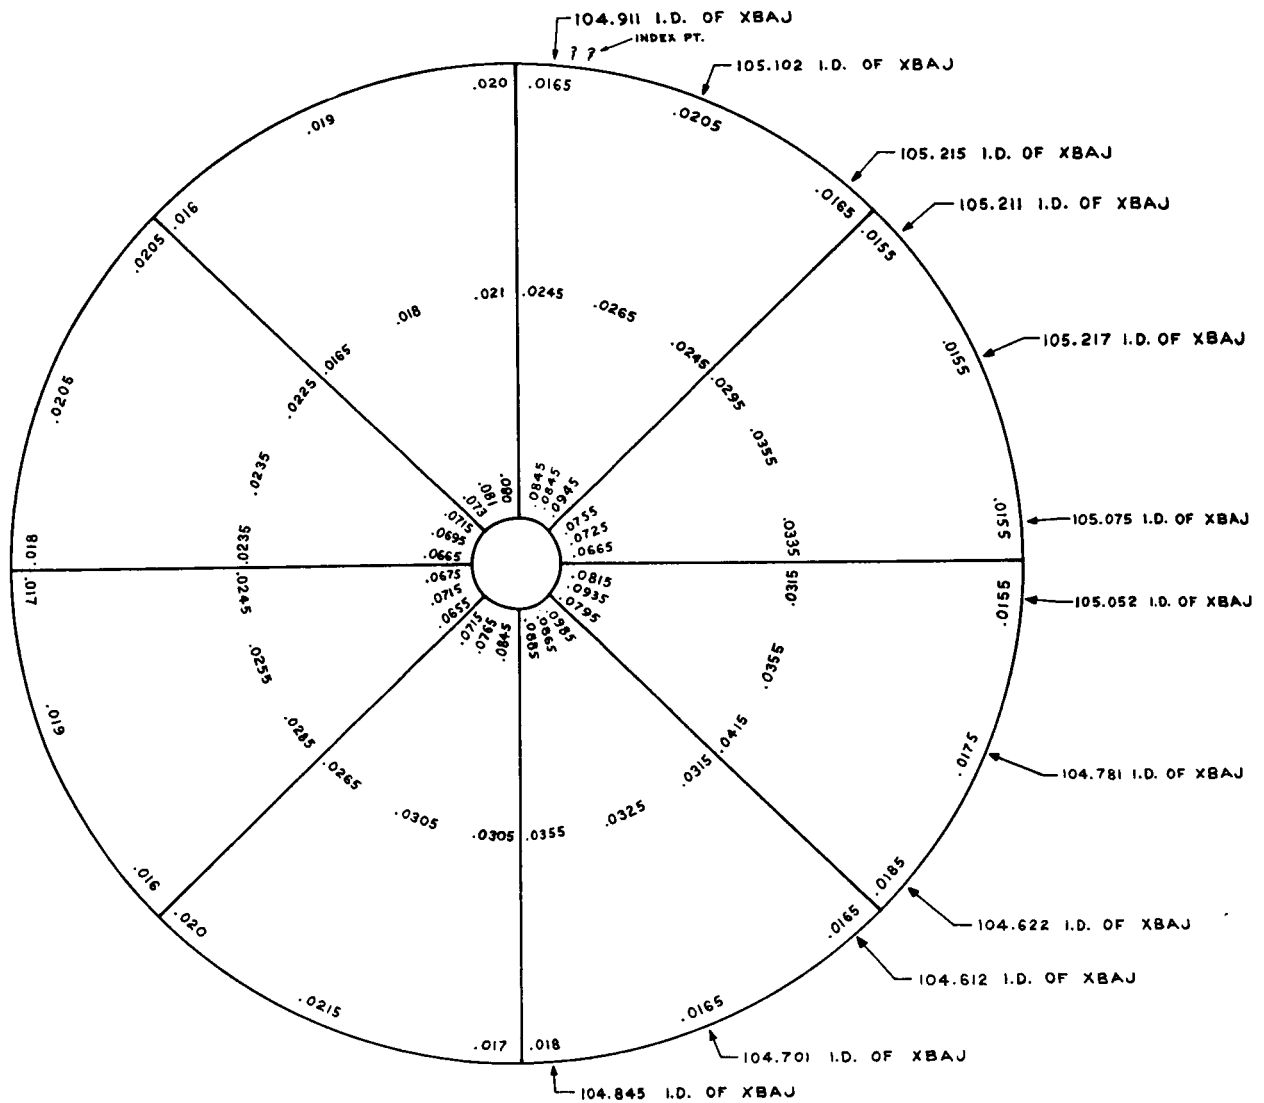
First Unit - Comparison Between Bonded Assembly and the Forming-Aging Tool - Free State Measurements
